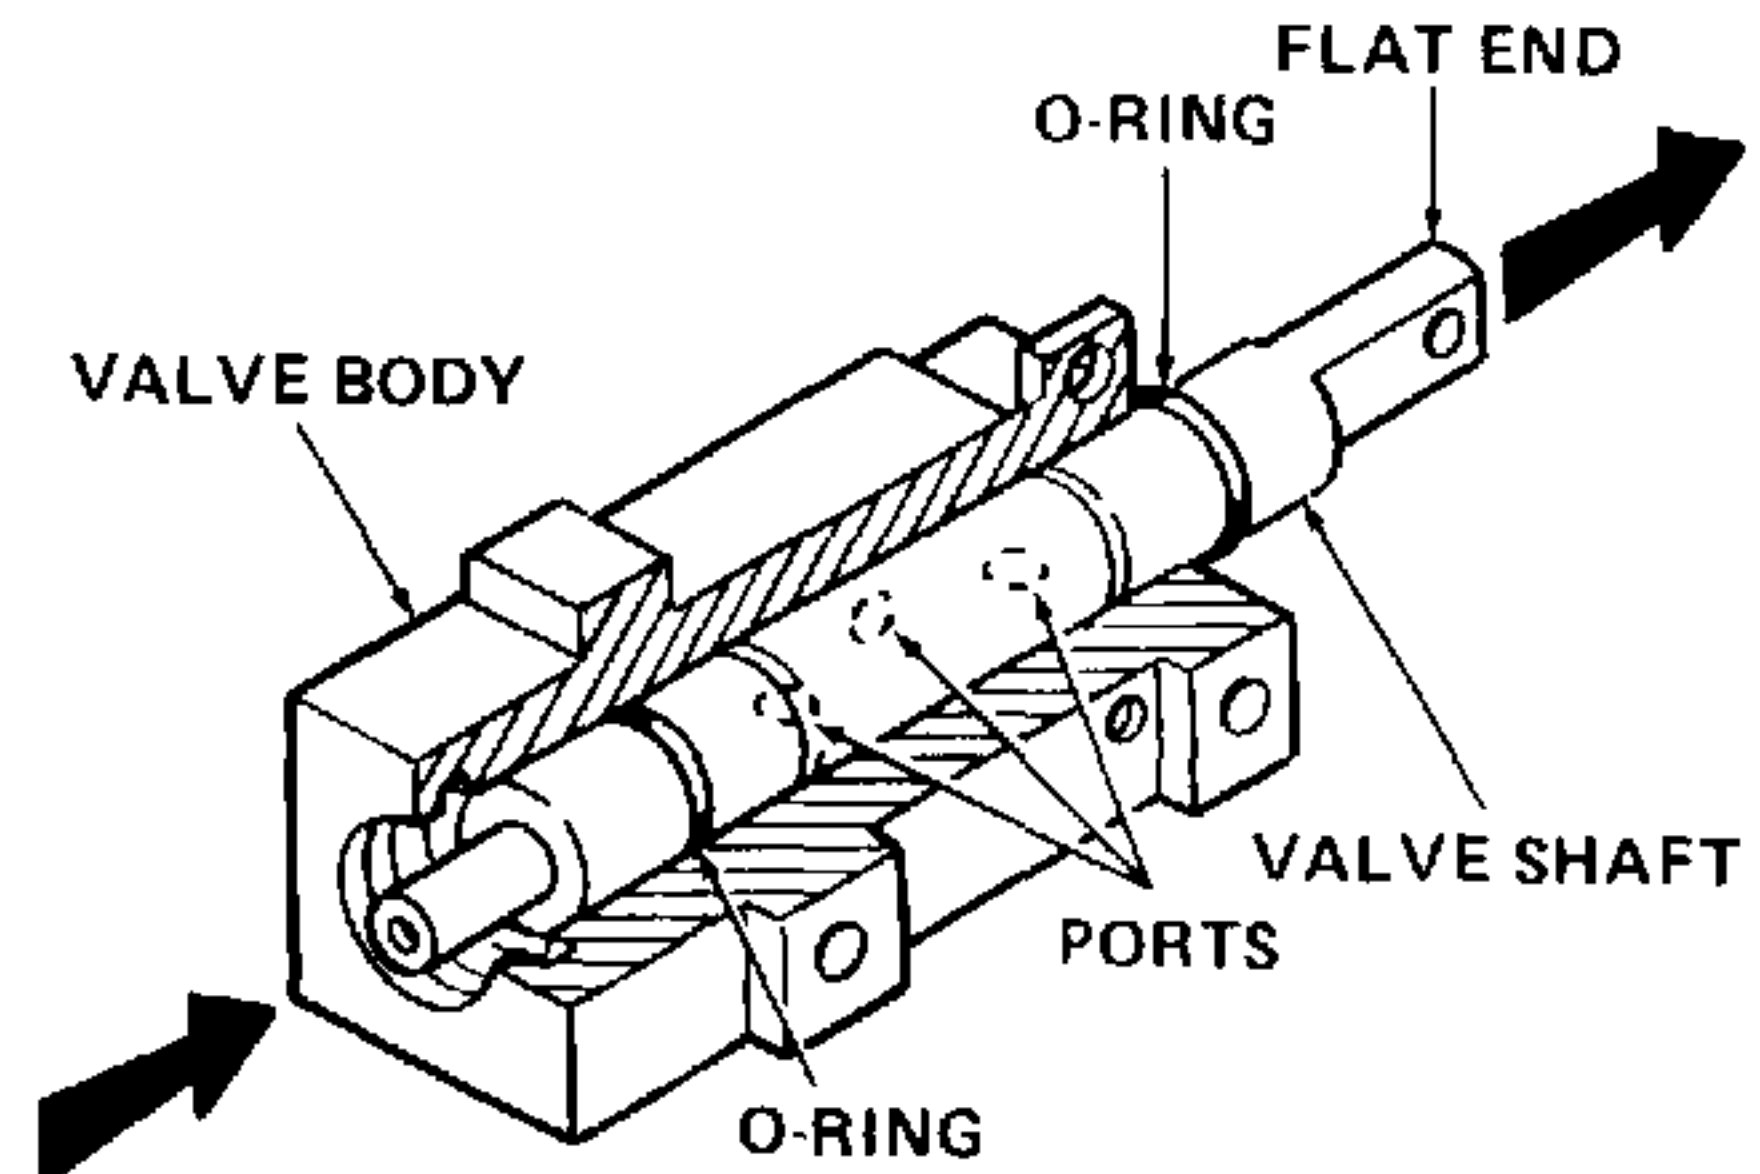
A. O-Rings Correctly Installed on Valve Shaft.
